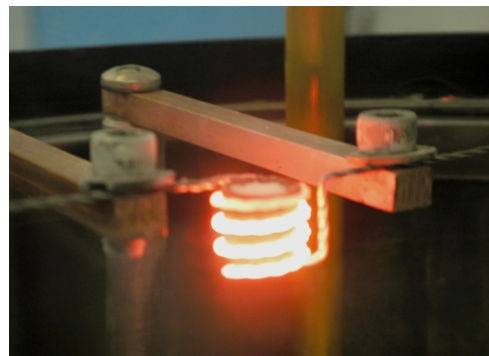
This filament-heated crucible is part of a salt coater used to apply a release layer to some molds before casting.
